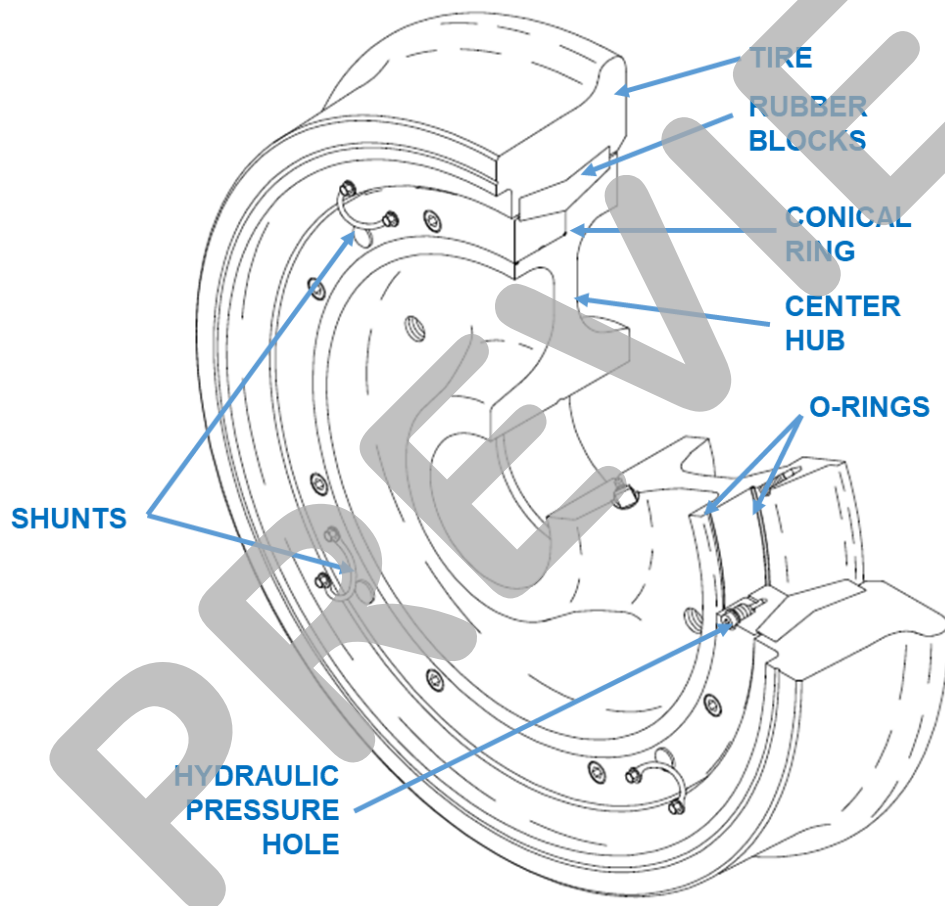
Wheel Assembly on Powered Truck –Courtesy VTA
